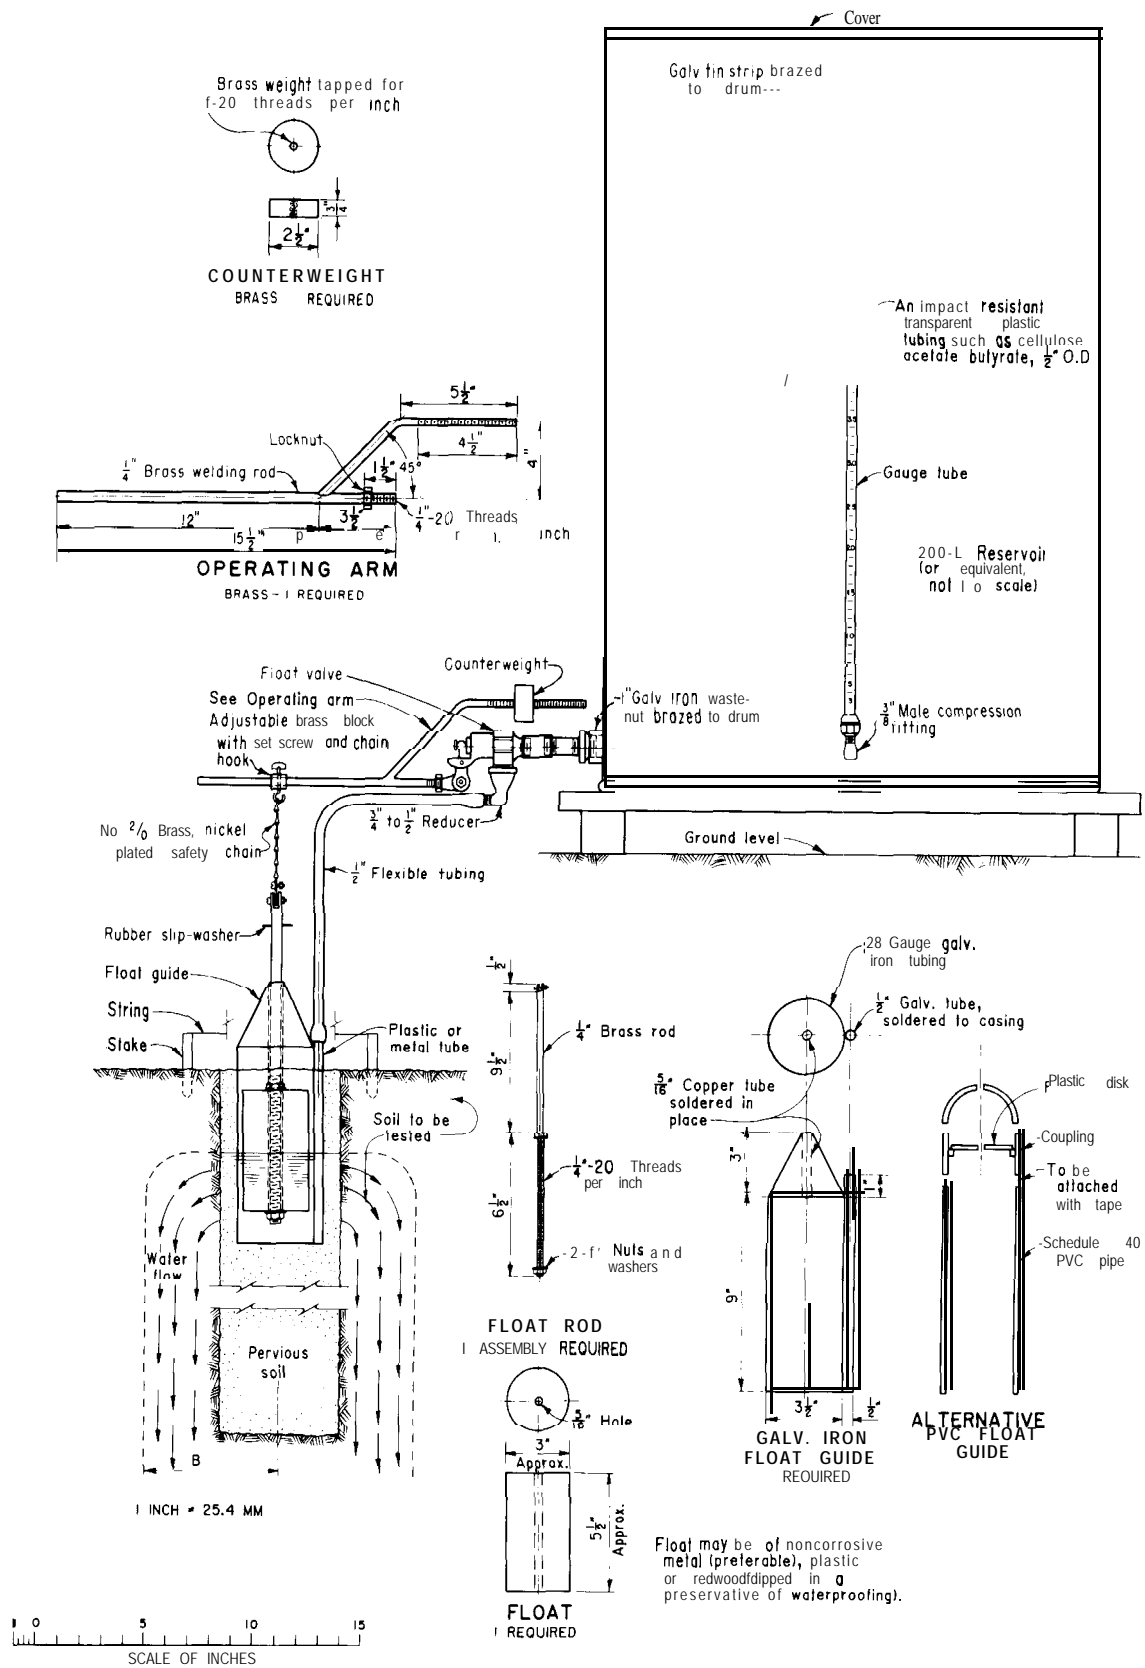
Drawing of well permeameter test apparatus (101-D-38)
